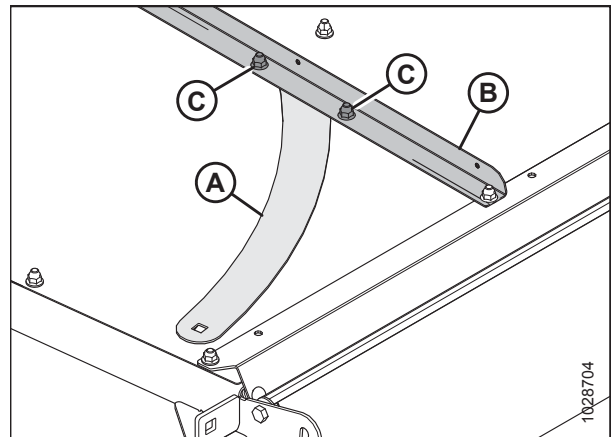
Deflector Adjustment Cover — Right Side Up
